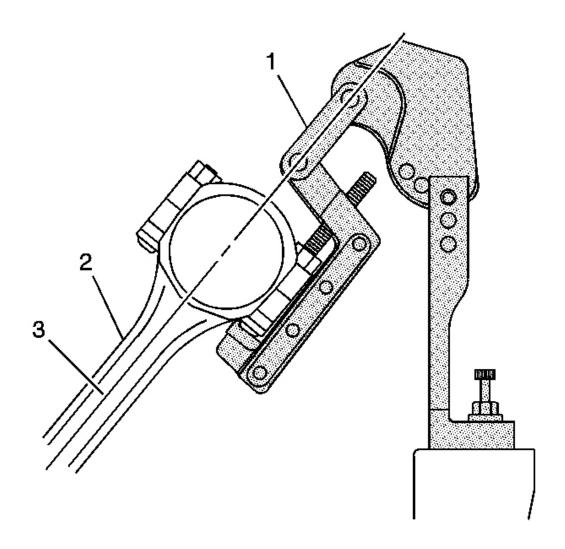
Aligning Pivot Arm Assembly Link On Connecting Rod Beam Plane Courtesy of GENERAL MOTORS CORP.
